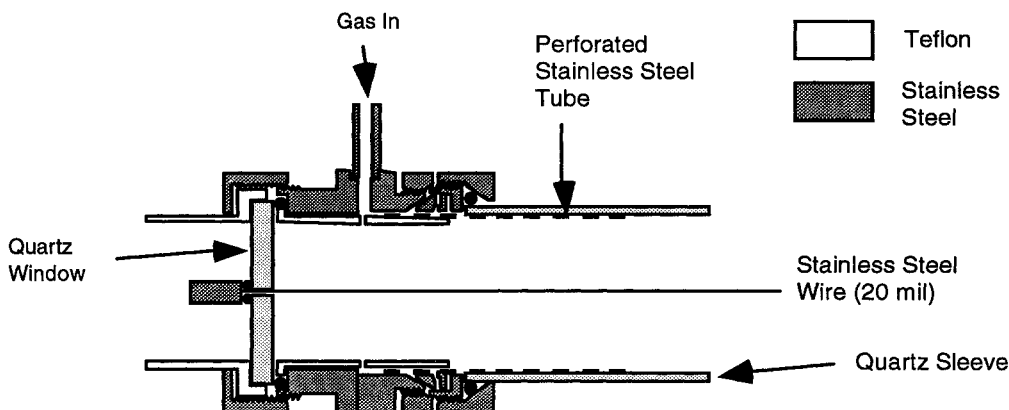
Cross sectional view of one end of the PCR reactor assembly.
